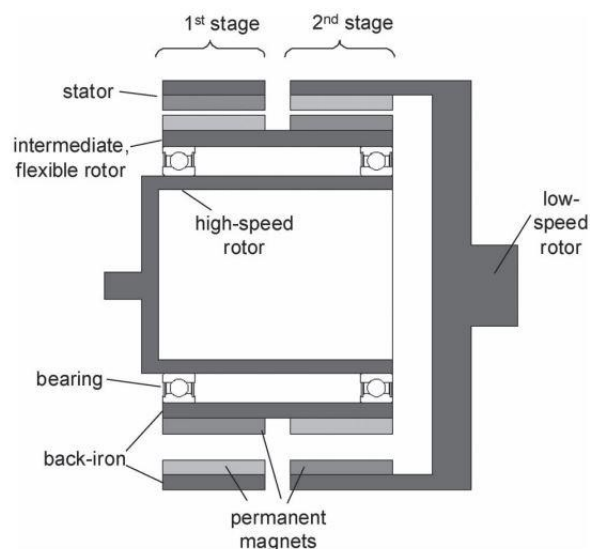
Rotor layout of 2 stage harmonic gear [81]-[82]
